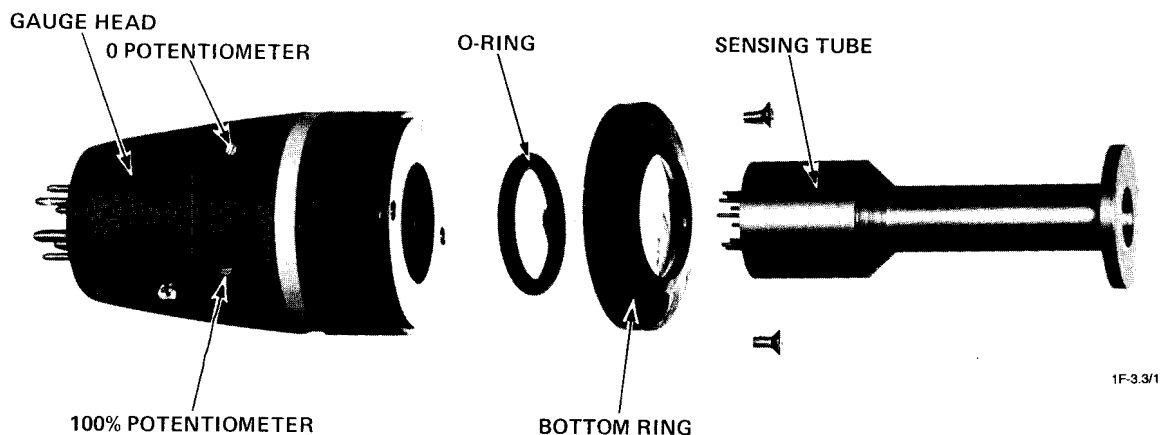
Disassembled TR201 Gauge Tube (PI and PII)
